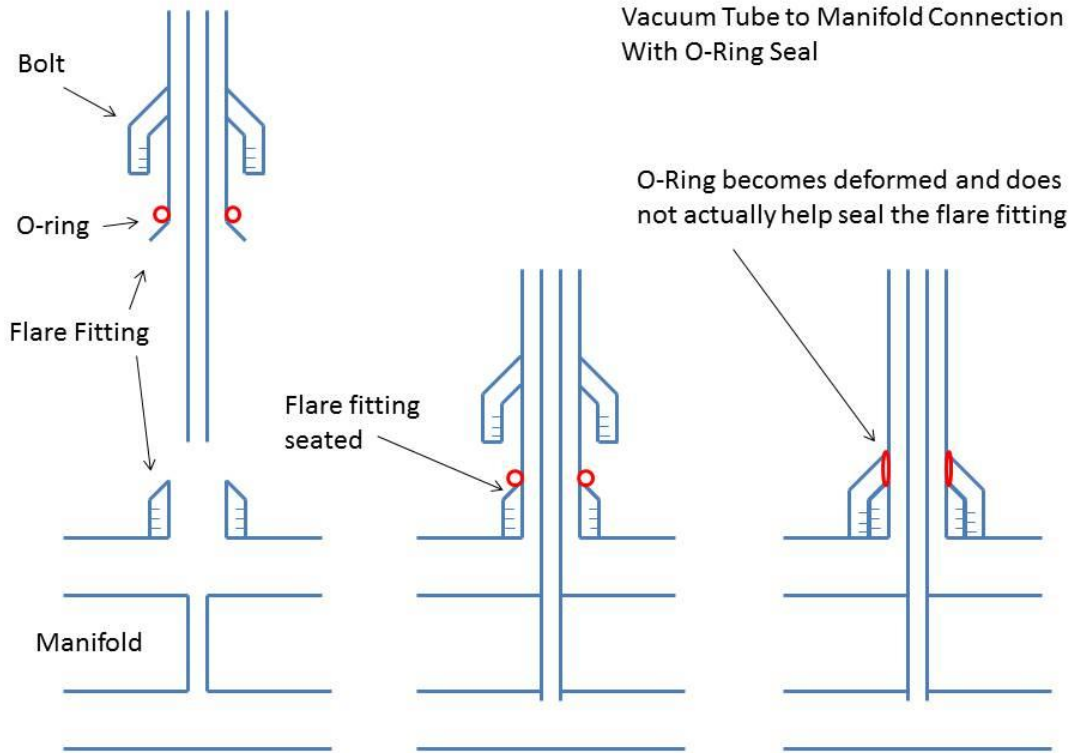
Vacuum Tube to Manifold Connection (O-Ring)
